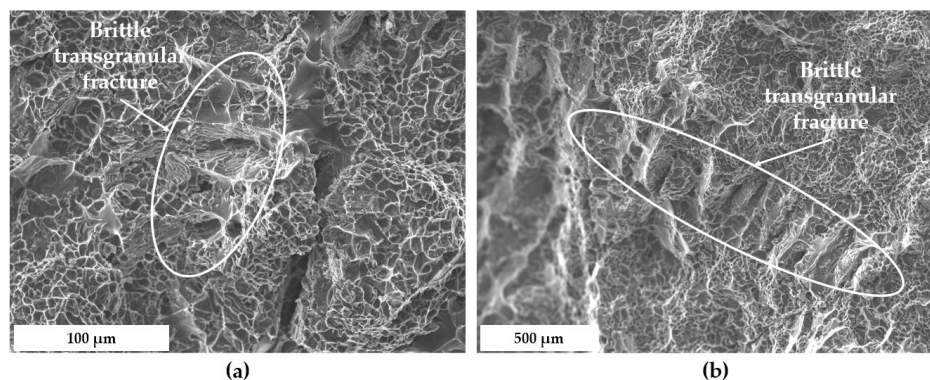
SE micrographs showing the details of brittle transgranular fractures on the fracture surfaces of tensile specimens in (a) ST1 and (b) ST4 conditions.
